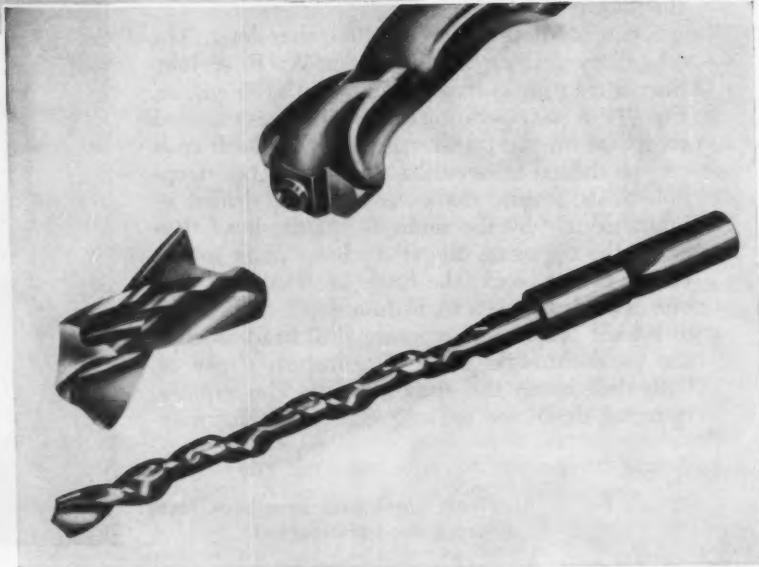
Close-up of single-flute Bi-Tip tube drills for the oil-gallery holes. The throw-away, high-speed tip is brazed to the shank and the coolant supply duct is oversize for greater flow.
